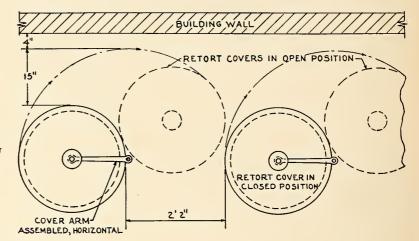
Plan for installing retorts with cover arm assembled in horizontal position.
